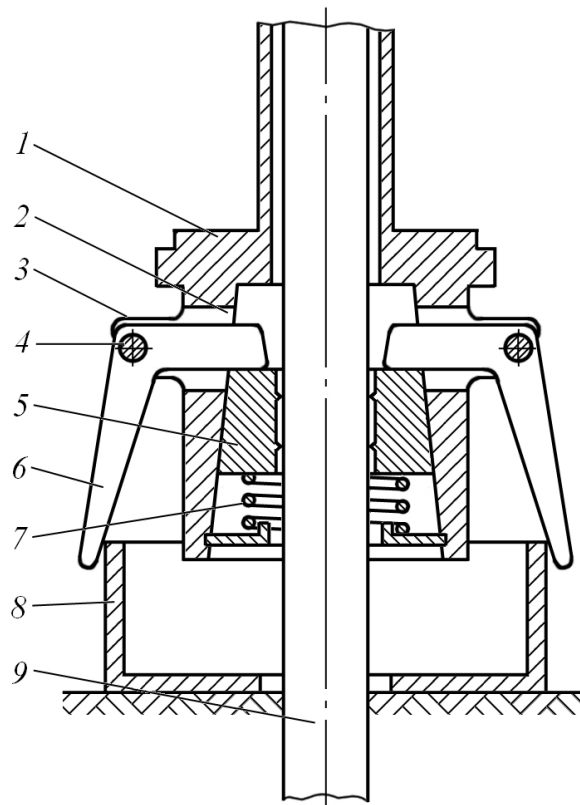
The structural diagram of the clamping mechanism with a self-locking wedge pair: 1 – anvil; 2 – window; 3 – bracket; 4 – axle; 5 – wedging element; 6 – an arm; 7 – return spring; 8 – thrust bearing; 9 – rod.
